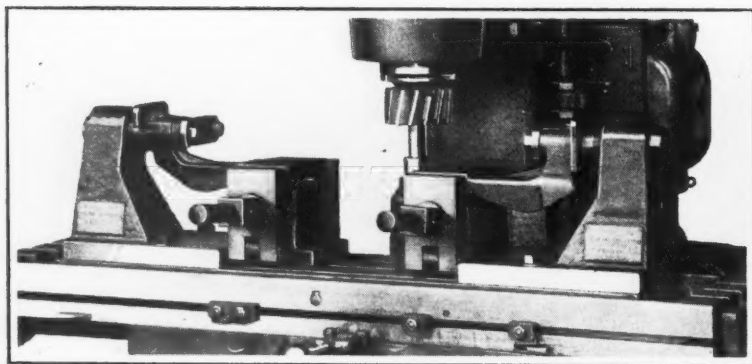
Vertical-spindle Machine Equipped for Milling Pads on Cast-iron Brackets
